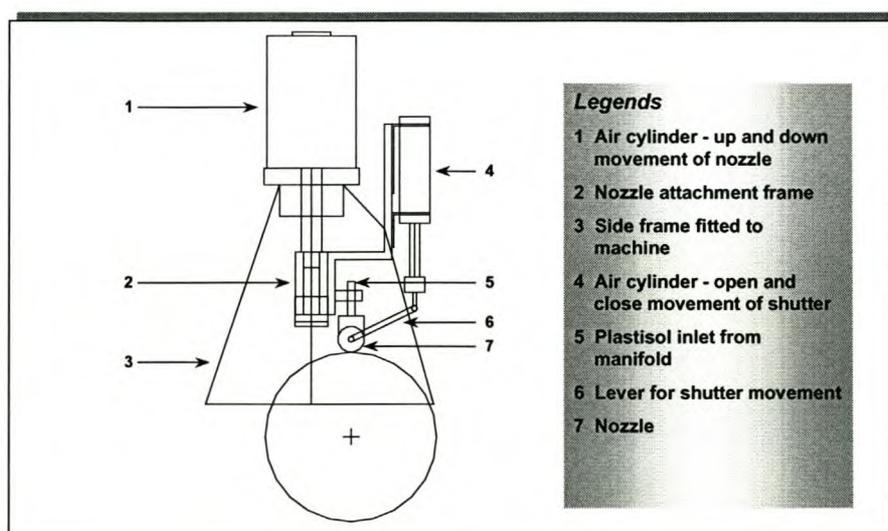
Side-view drawing depicting the assembly of the dispensing head for dispensing the plastisol and sodium metabisulphite mixture onto the paper (drawing courtesy of J.J. vd. Westhuizen, Stellenbosch University).
